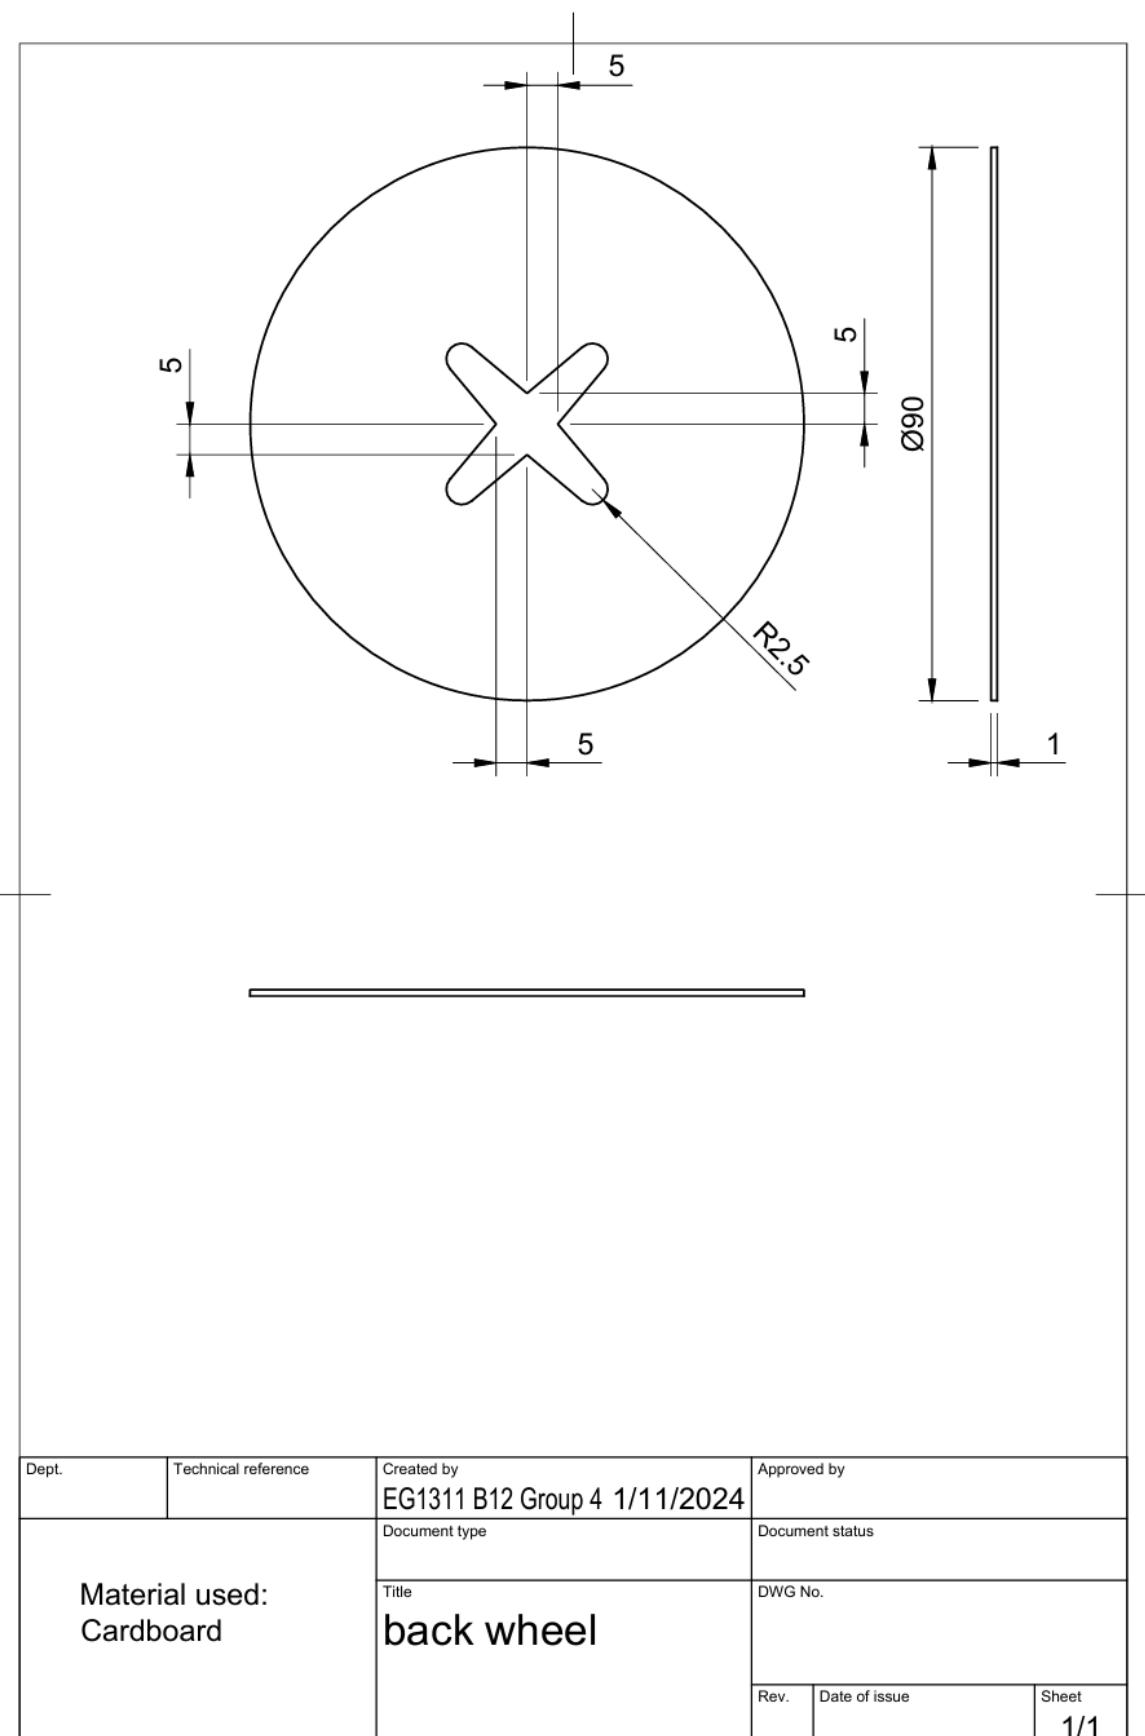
2D CAD Drawing Dimensions of Back Wheels
